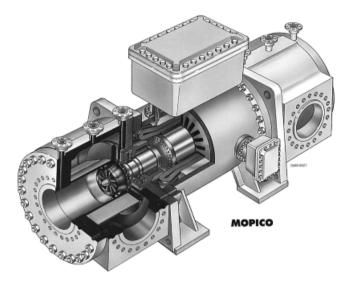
Sulzer Mopico motor pipeline compressor, incorporating magnetic bearings. (Sulzer, Ltd., Winterthur, Switzerland)
